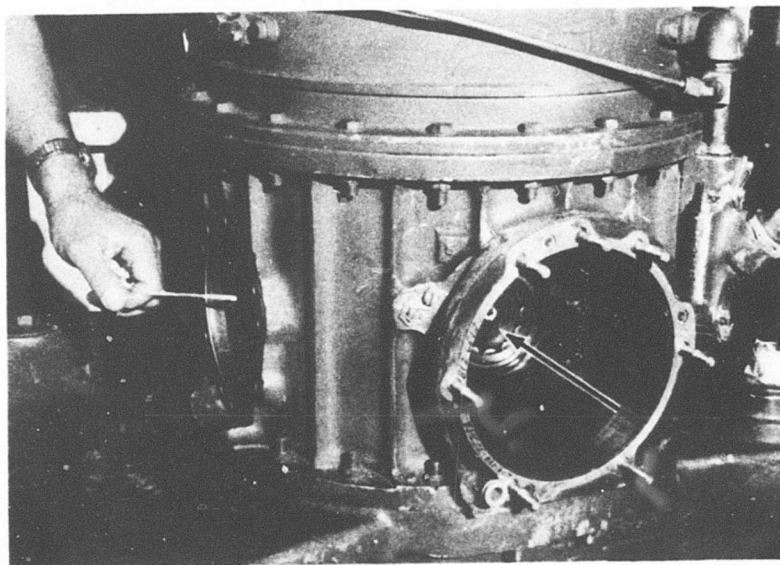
Rubber plug temporarily inserted in roller bearing, UH-1 transmission.
